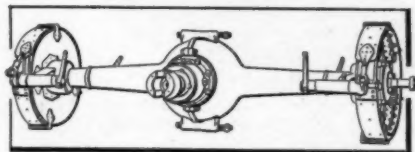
Live rear axle of the drawn-steel tube type swelled at the center to accommodate the differential gear and bevel drive
